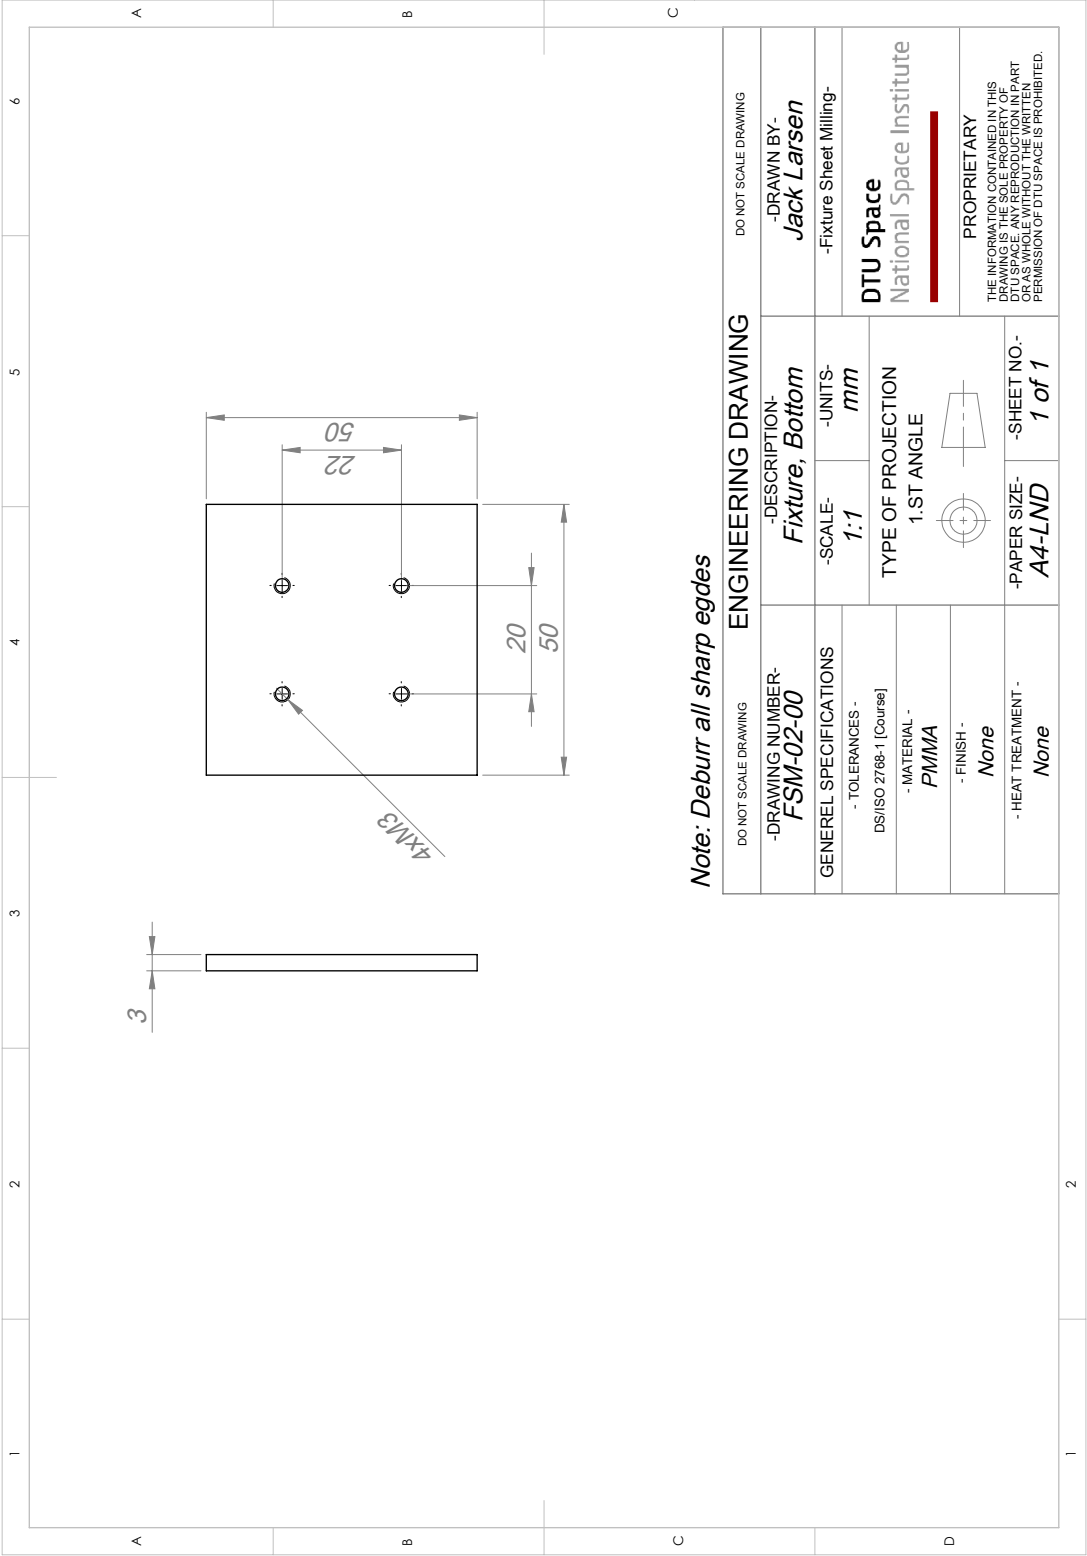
Milling Tools: Fixture Sheet Milling, Bottom. Fixture used for milling the sheets for the heaters of design D13 and D14.
